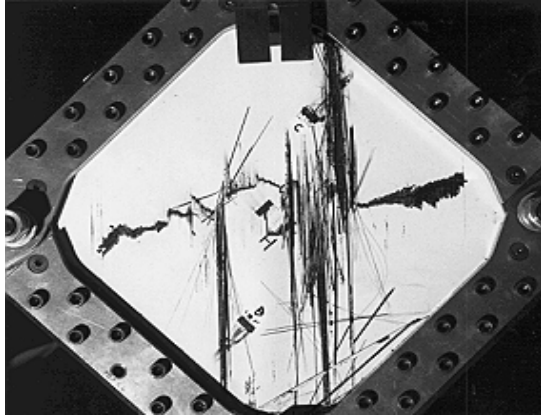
Typical undamaged panel failure showing tension failure and fibre pull-out
